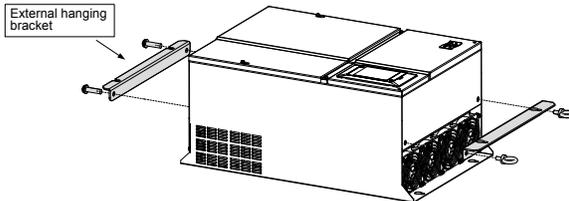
Embedded installation of the IS300 (sheet metal housing)
